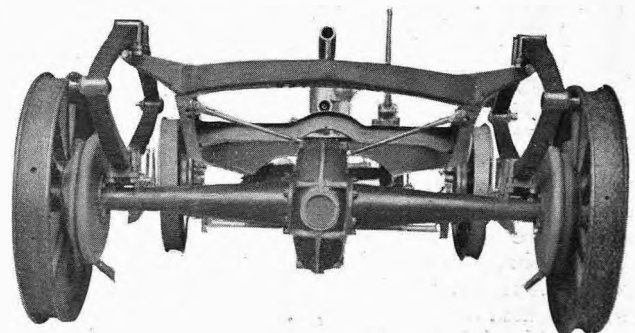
The above rear view of the Arrol-Johnston chassis shows the parallel-motion stay-rods that enable full elliptic rear springs to be employed.
